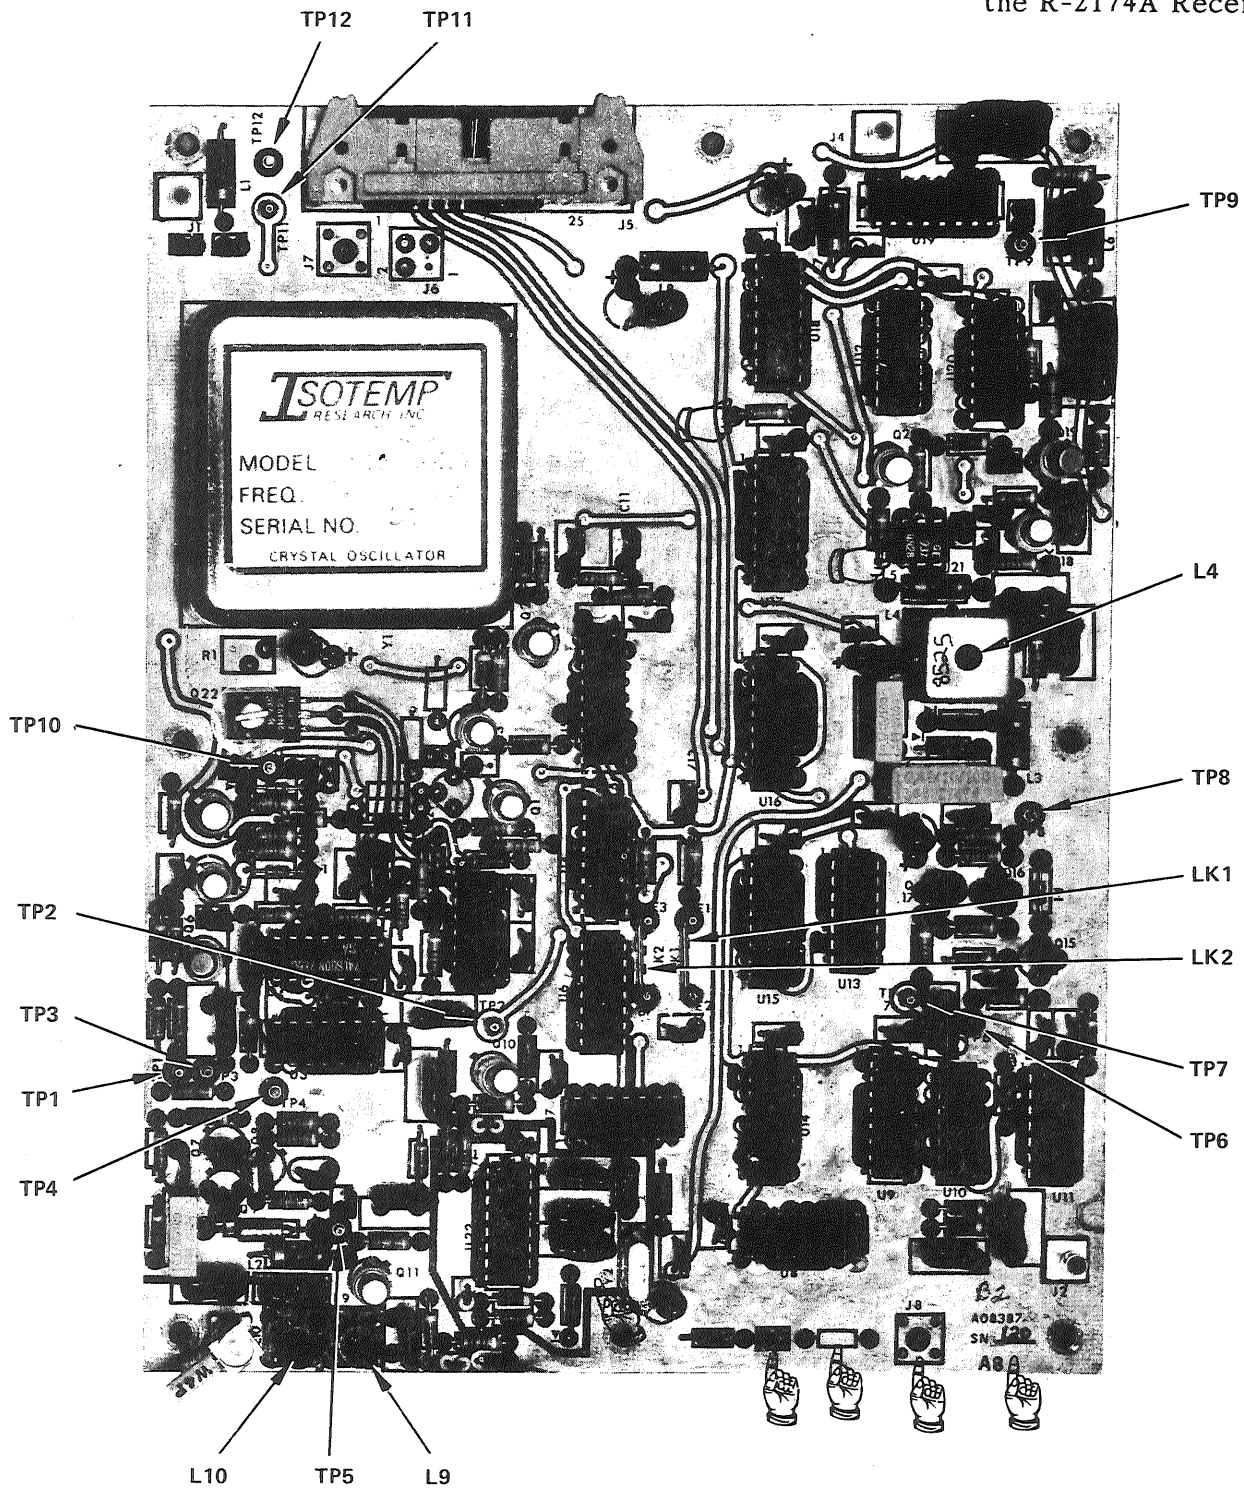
A. Second LO/BFO Circuit Card Assembly A8
